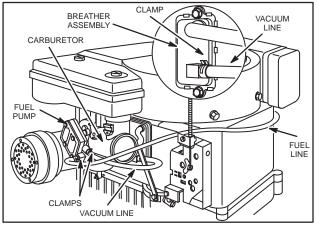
PUMP ON CARBURETOR, BREATHER VALVE VACUUM
